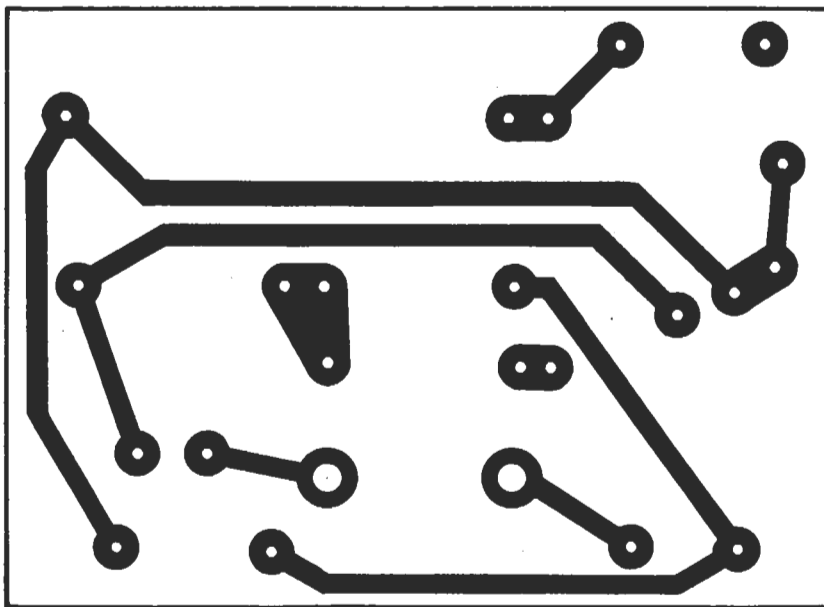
Full-size drawing of the PC board designed by the authors. Component arrangement can be seen in the photo above and in Fig. 3. The diameter of the large holes should be adjusted to suit the milliammeter lugs used in your project. Some meter lugs are this diameter, but others are somewhat larger.
